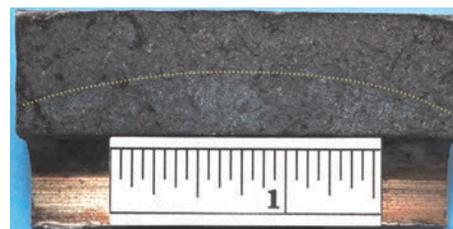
Photograph of an opened stress-corrosion crack in a steam turbine disk. Dashed line highlights the crack-arrest mark observed on the fracture surface.
